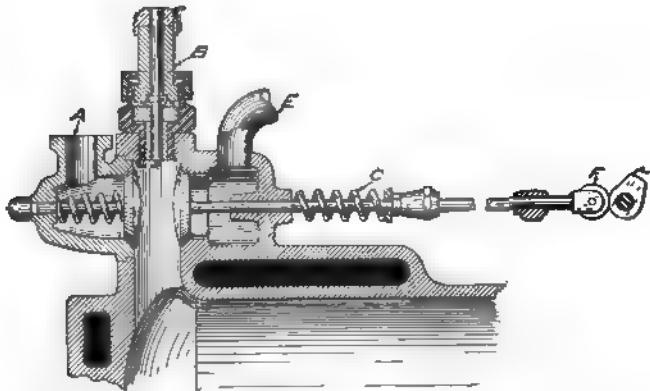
Detail Diagram of the Valves and Attachments of a Gas Engine Cylinder.
